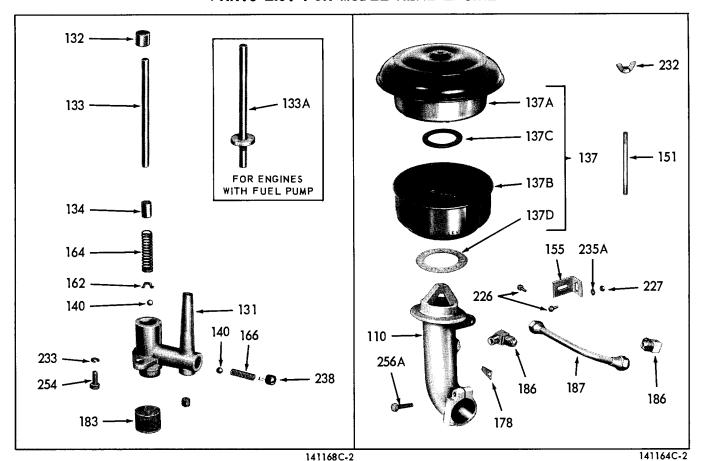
, Ref. No. 130, OIL PUMP ASSEMBLY
